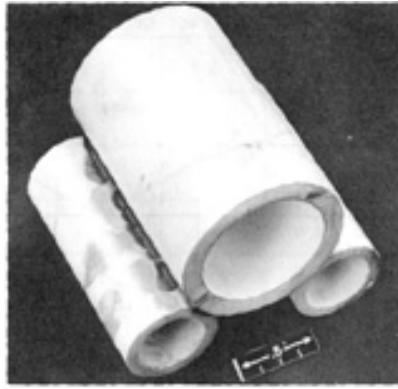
BERYLLIUM OXIDE TUBULAR ASSEMBLY BRAZED WITH 49TI-49CU-2BE FILLER METAL
